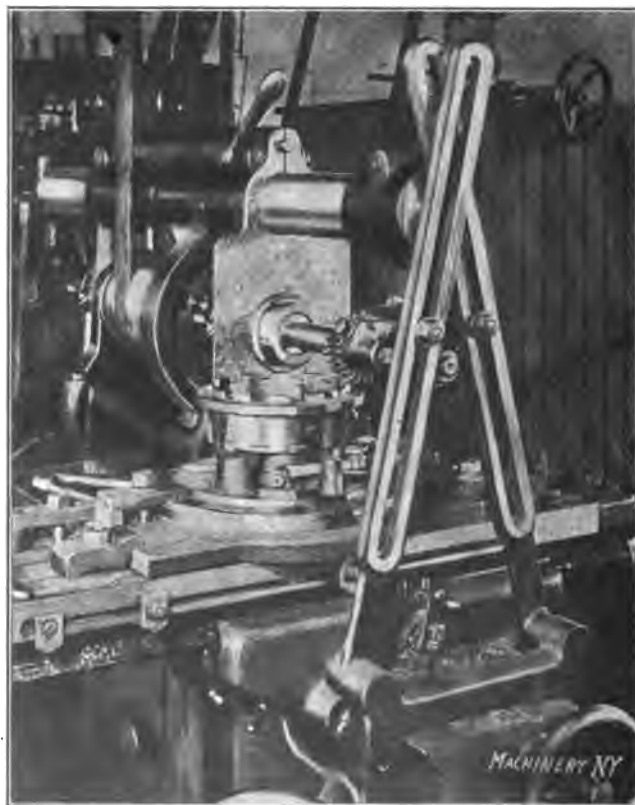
Milling the Drive Tongues in the Gear Case—Second Operation
